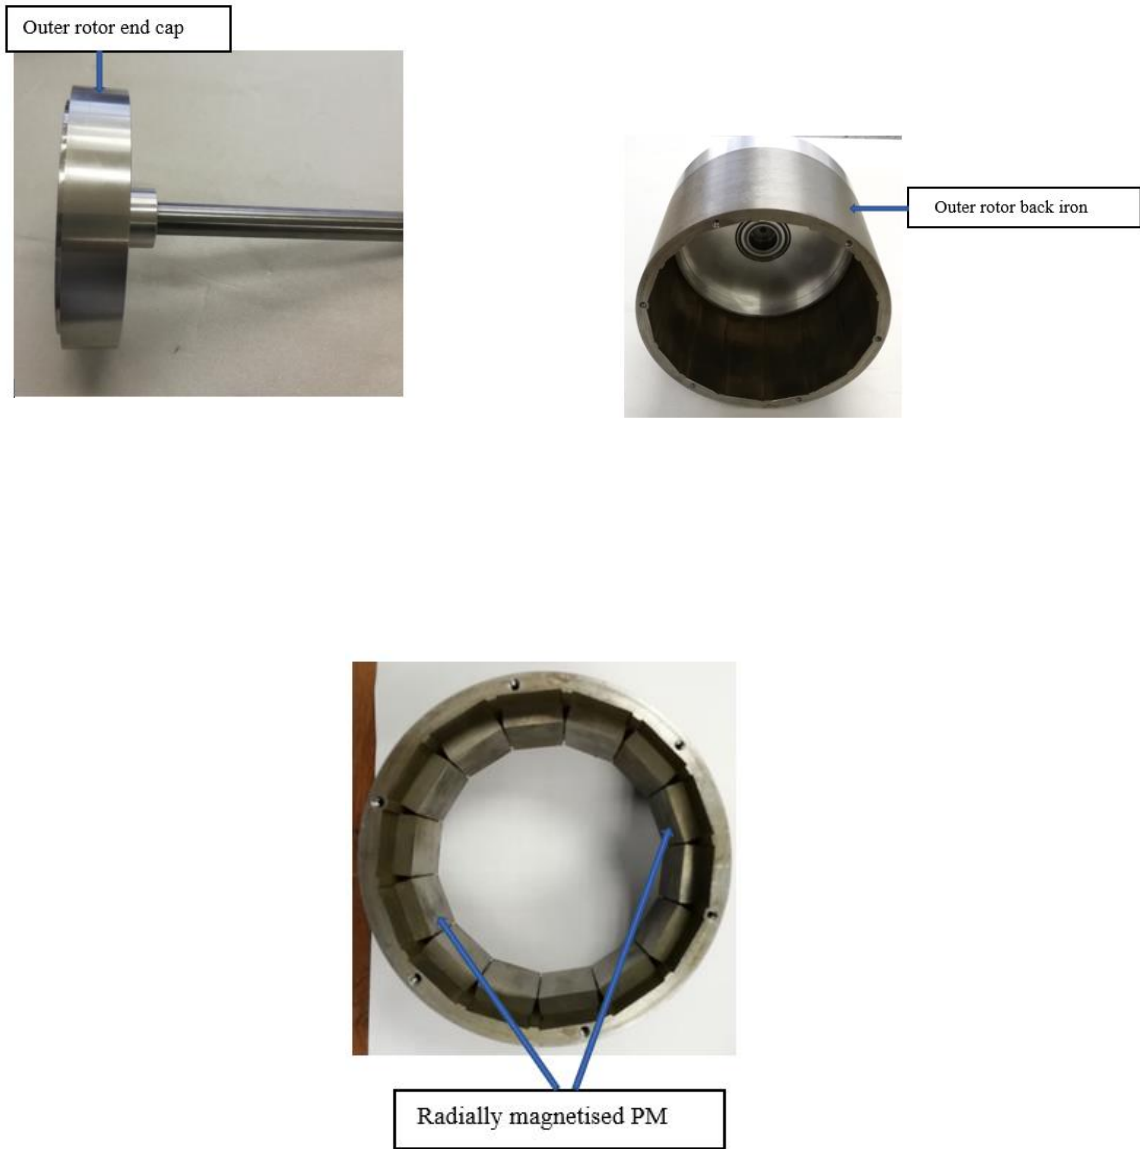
5 Outer rotor with magnets of the PMECC prototype
